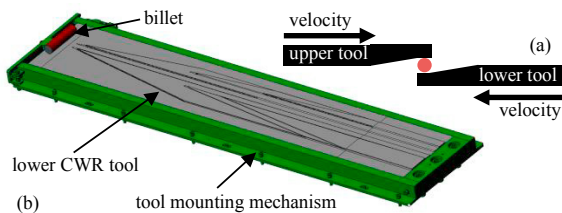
(a) Process kinematic; (a) Lower Cross-Wedge Rolling tool.
